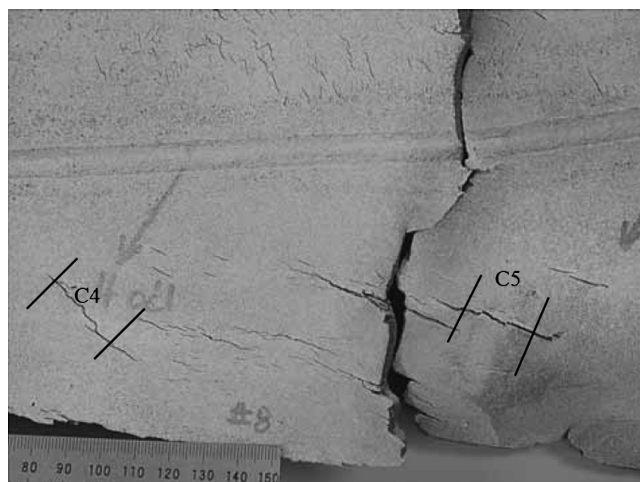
Multiple branching cracks typical of many stress corrosion cracking failures.<sup>55</sup>
